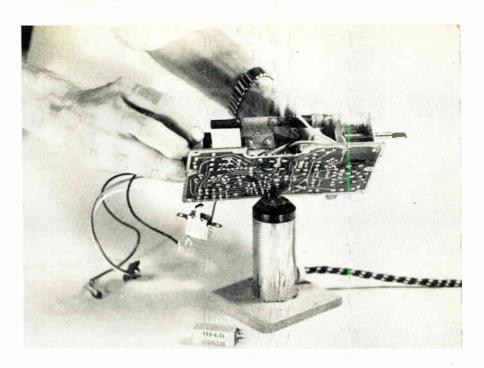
Motorola's plated circuit chassis is here being selectively dip soldered
